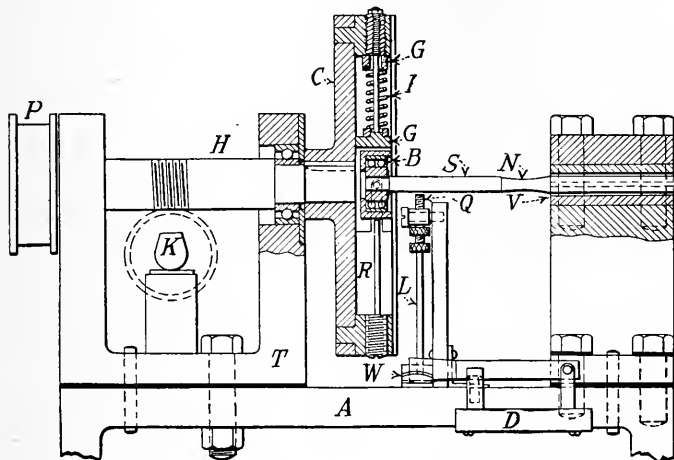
Diagram of reversed-flexure rotating spring-type testing machine.
